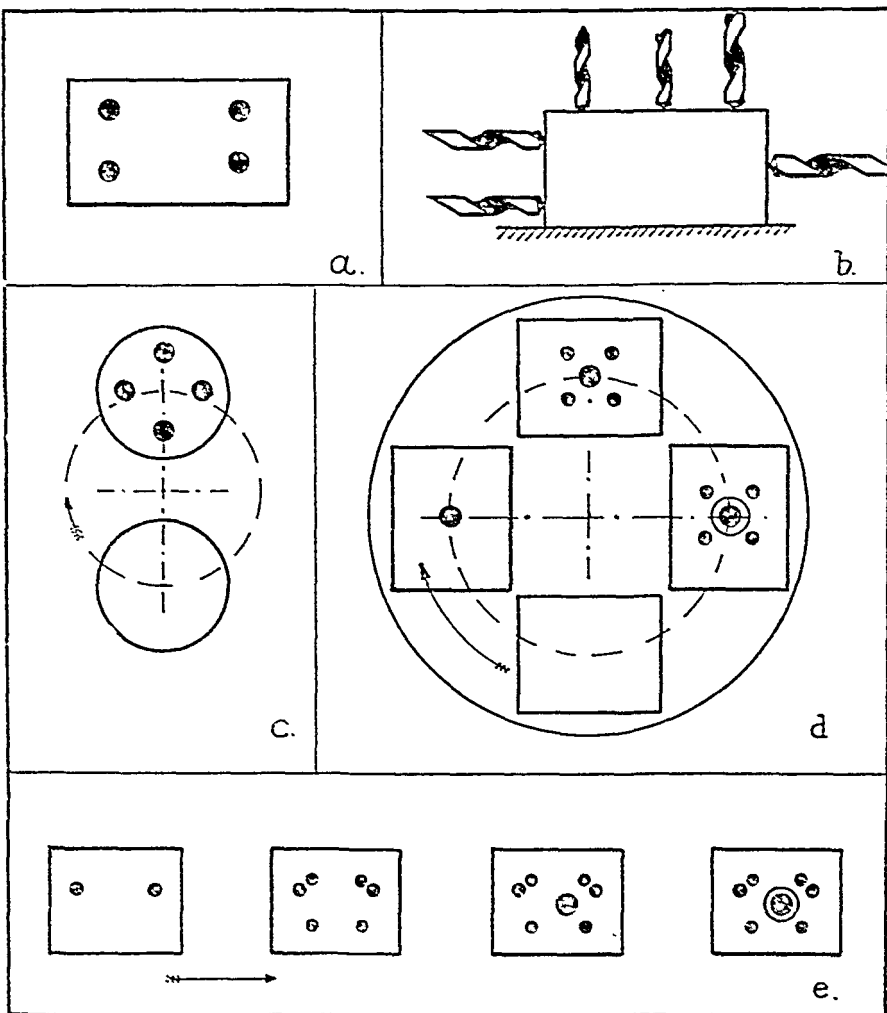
MULTI-SPINDLE AND GANG DRILLING
